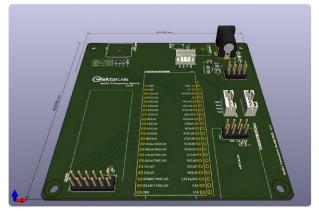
3D rendering of the new dual radio PCB. As you can see, the power jack connector would collide with the second radio module at the backside of the board, so do not populate it! By the way, the three pin headers depicted here should be all pin sockets (female).
